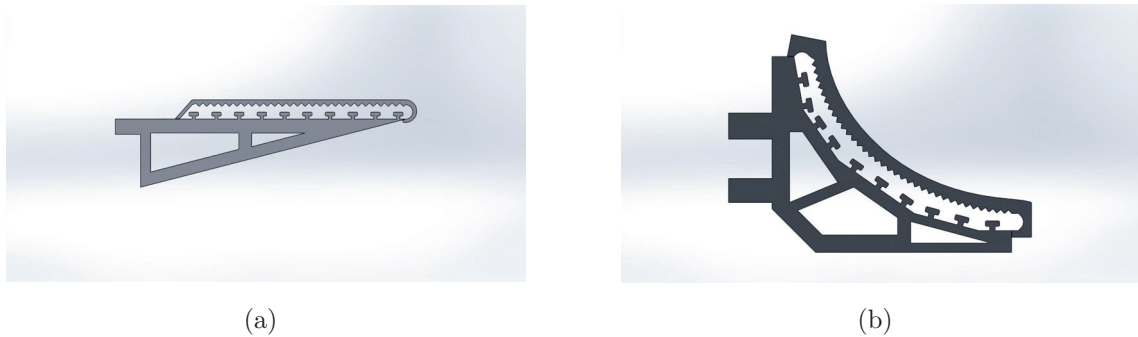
Supporting finger design (a) Initial design (b) Second Design.
